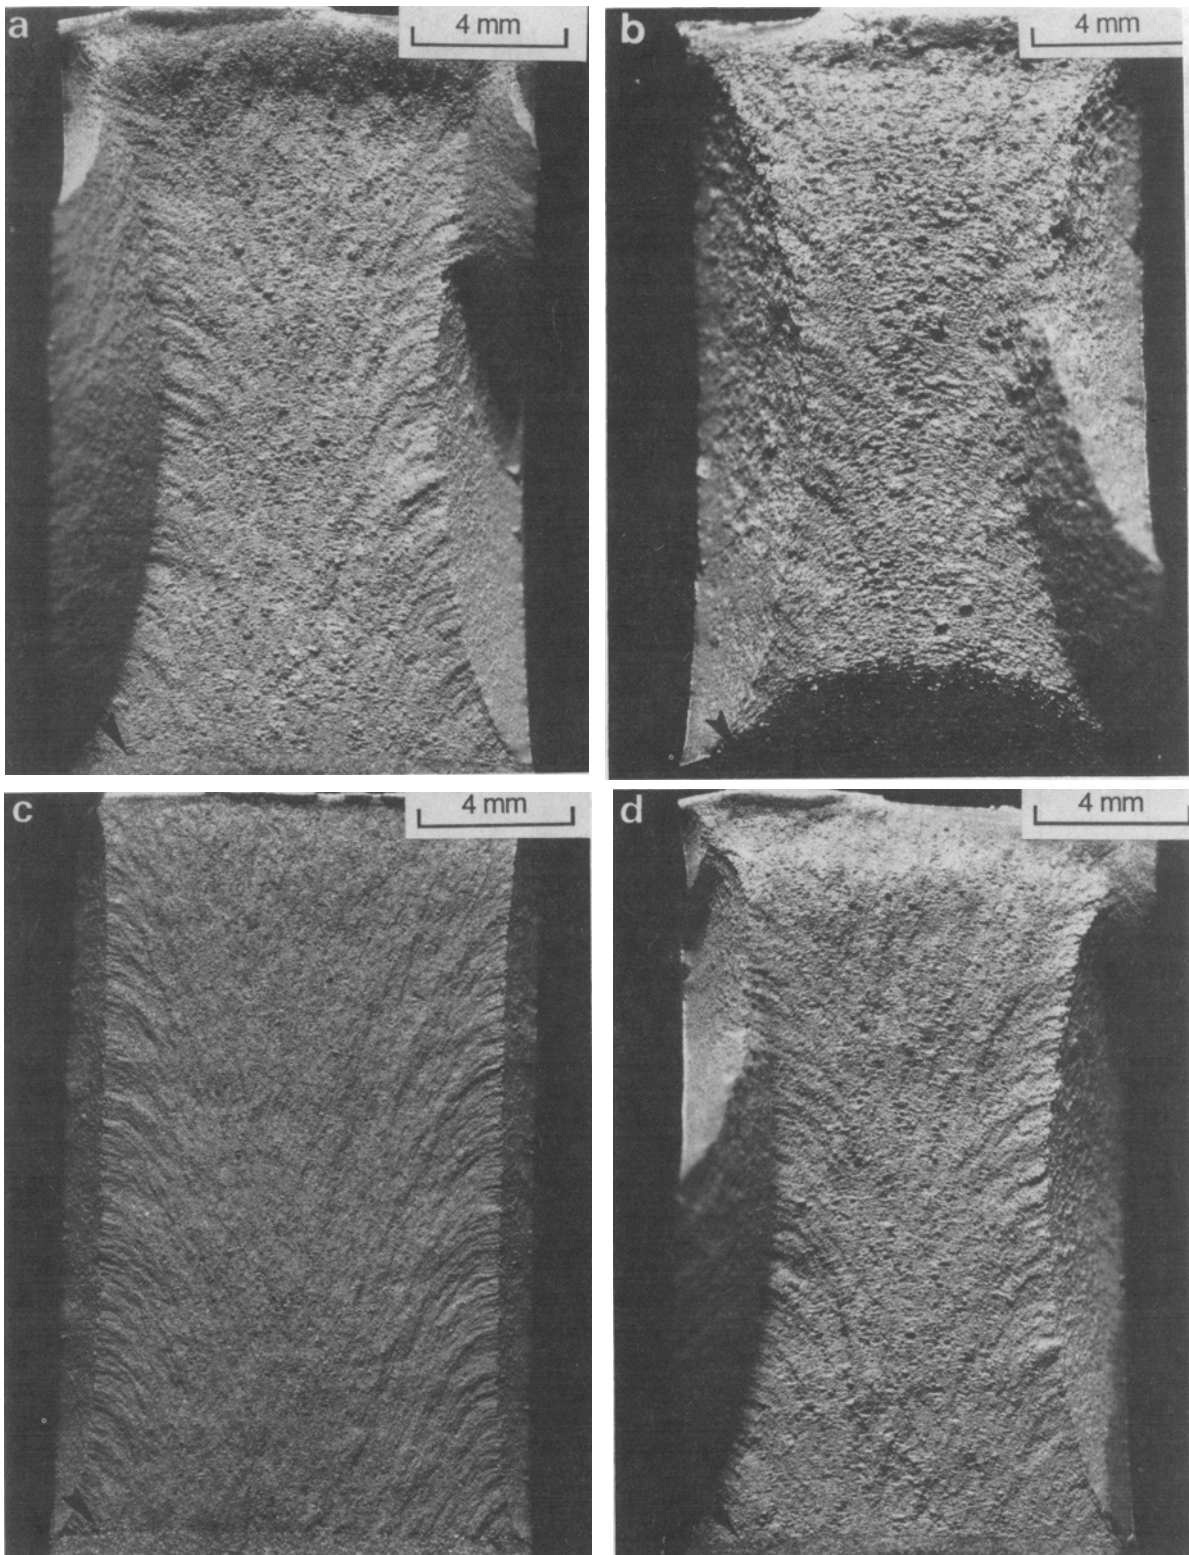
Low magnification photographs of fractured compact tension specimens of AF1410: (a) heat 1, 425 °C; (b) heat 1, 510 °C; (c) heat 2, 425 °C; (d) heat 2, 510 °C.
